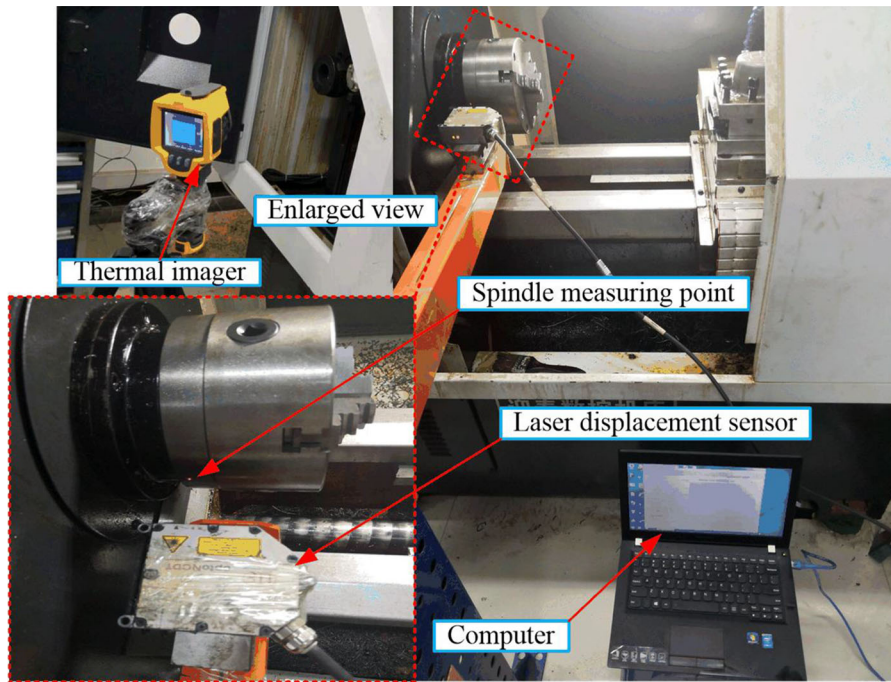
Radial response experiment rig for CNC lathe spindle-bearing system
